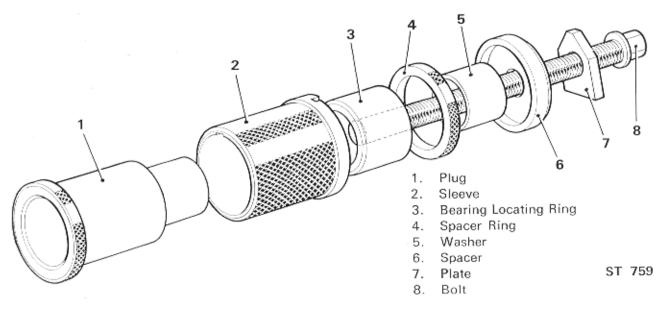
Components of Main Bearing and Camshaft Bush Tool
